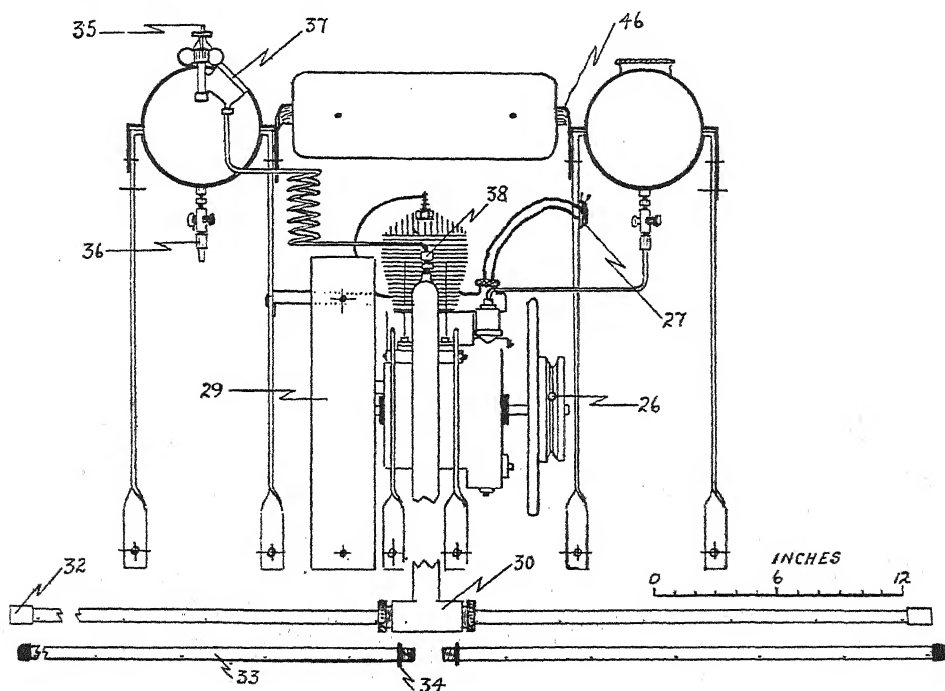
Back elevation of engine, nicotine and exhaust assembly.
